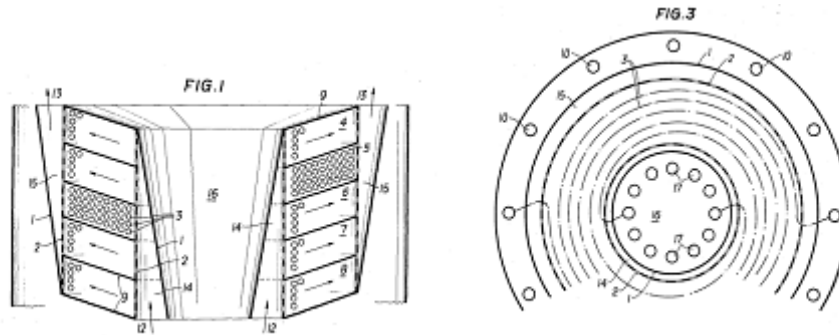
CTAH elevation and plan views, taken from Gilli et al. patent [19].
